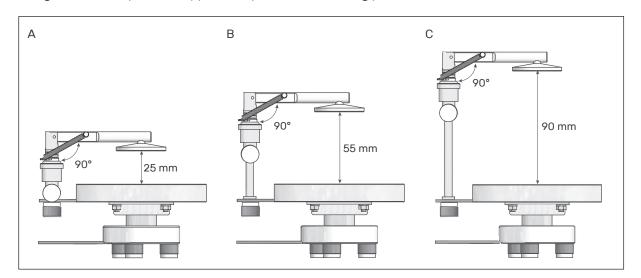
Adjusting the spring-loaded clamp's distance to the cheek plate.
